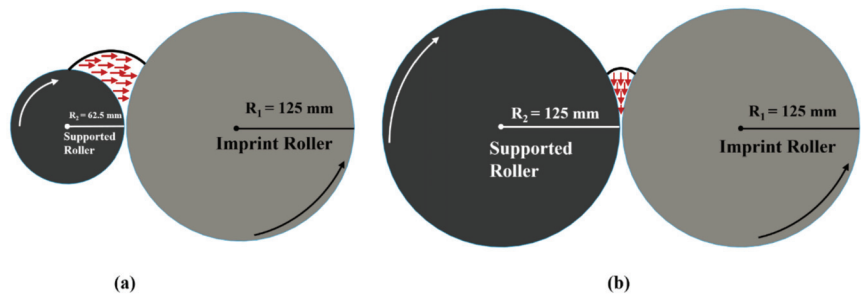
(a) Schematic diagram of filling direction of UV resin with supported roller with half of diameter of imprinting mold. (b) Schematic diagram of filling direction of UV resin with supported roller and impression mold of same diameter.
